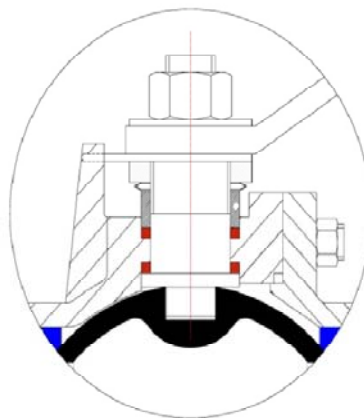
Locknut type adjustable packing for Manual Ball Valve
